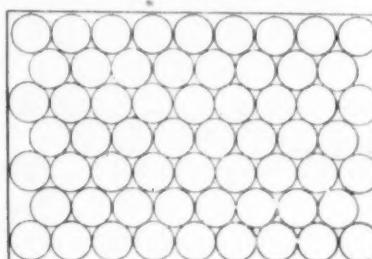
METHOD OF BLANKING WITH ZIG-ZAG PRESS.
